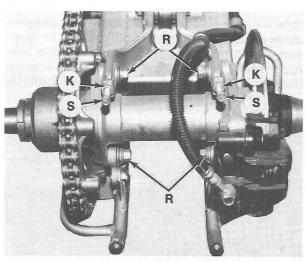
To adjust drive chain tension, loosen upper and lower axle housing retaining screws (R), then loosen left and right locknuts (K) and rotate adjuster screws (S) in equal increments.
